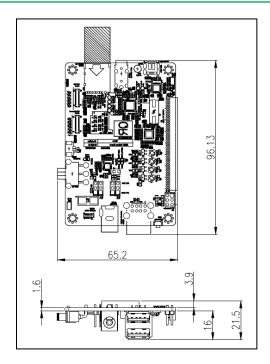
Mechanical Drawing ARTIK 710 Platform Board all dimensions are in [mm]
